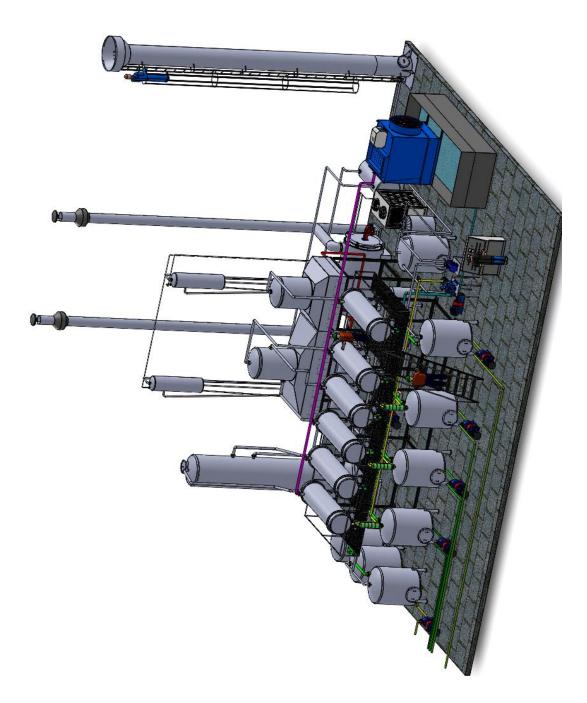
3D design of the lube oil recycling unit (isometric view:2)
